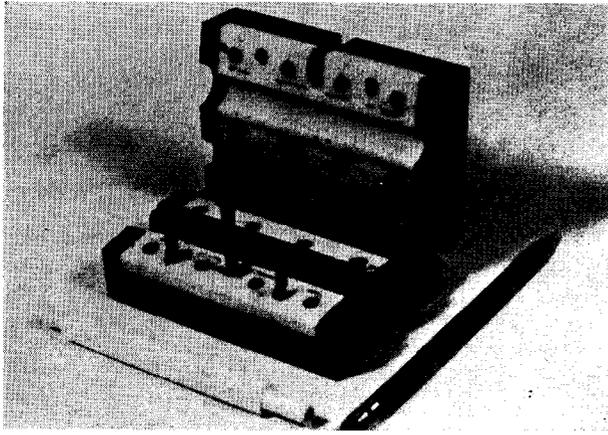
Photograph showing the mold in an open position, the mandrel and the specimen ready to be removed.
